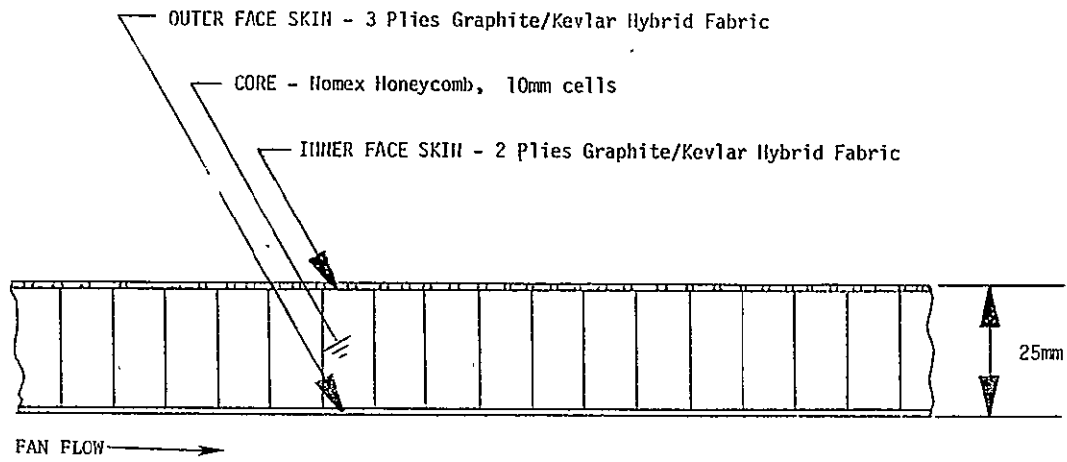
Fan Reverser, Outer Barrel and Blocker Door Construction.
